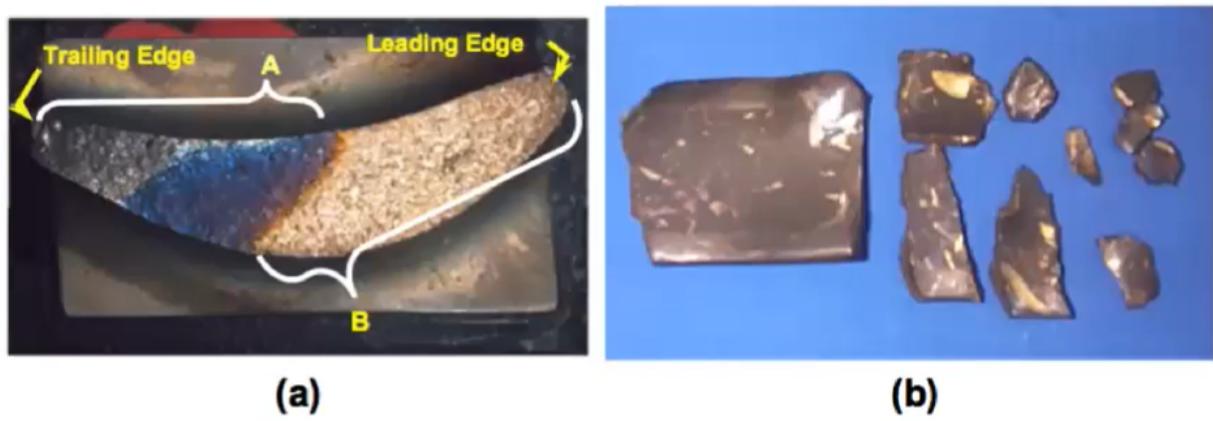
Failed blade, (a) fracture surface, (b) remains of the airfoil.
